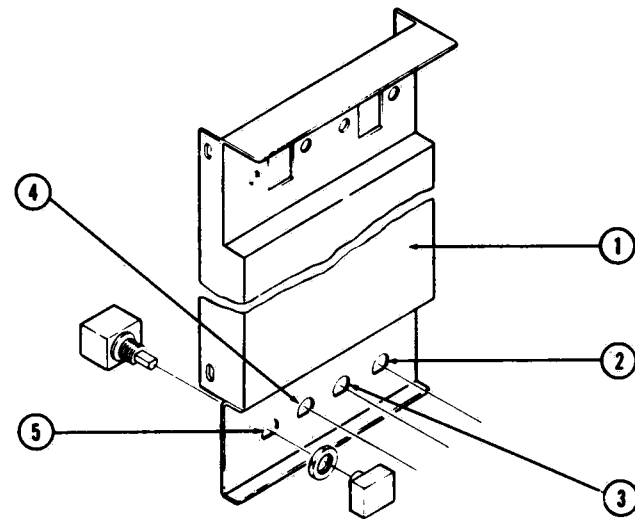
SWITCH ASSEMBLY: Operating End Power Door.
